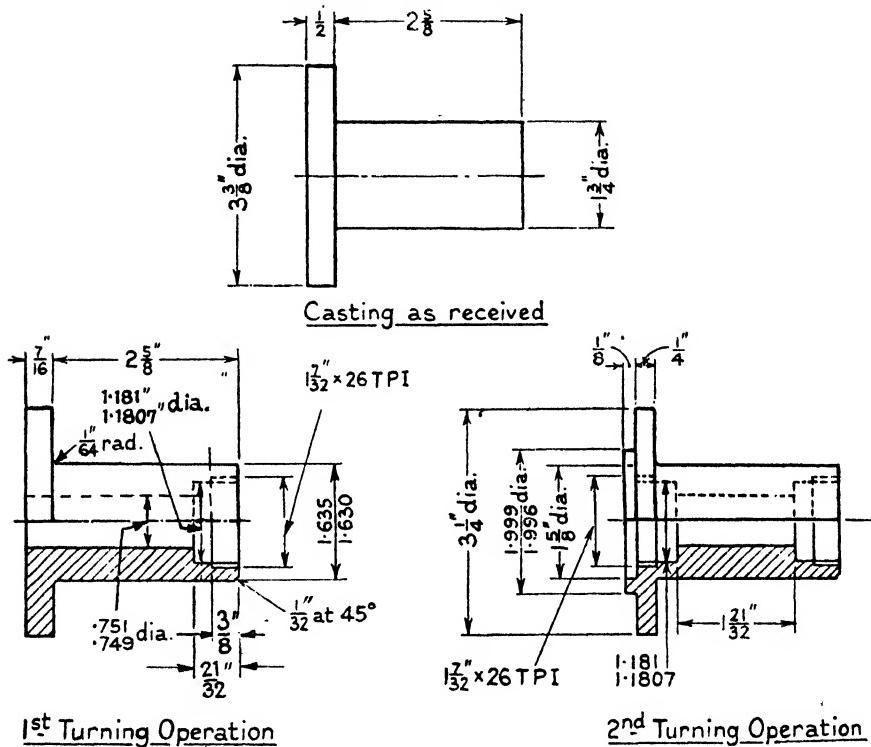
INTEROPERATION DRAWINGS FOR SHANK
